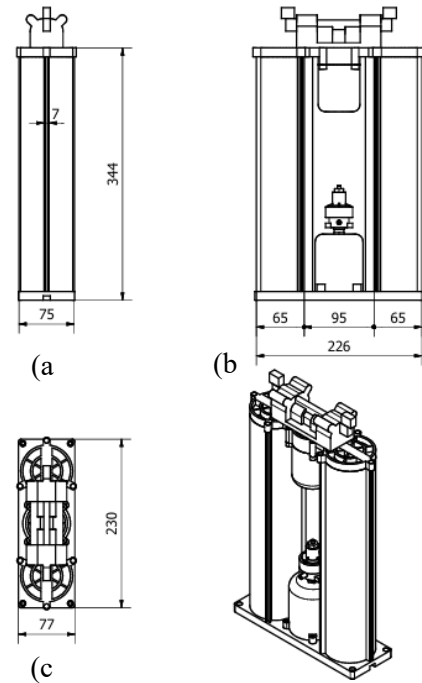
Main views of the Zeolite mechanism and cylinders. (a) Side View, (b) Front View (c) Top View
